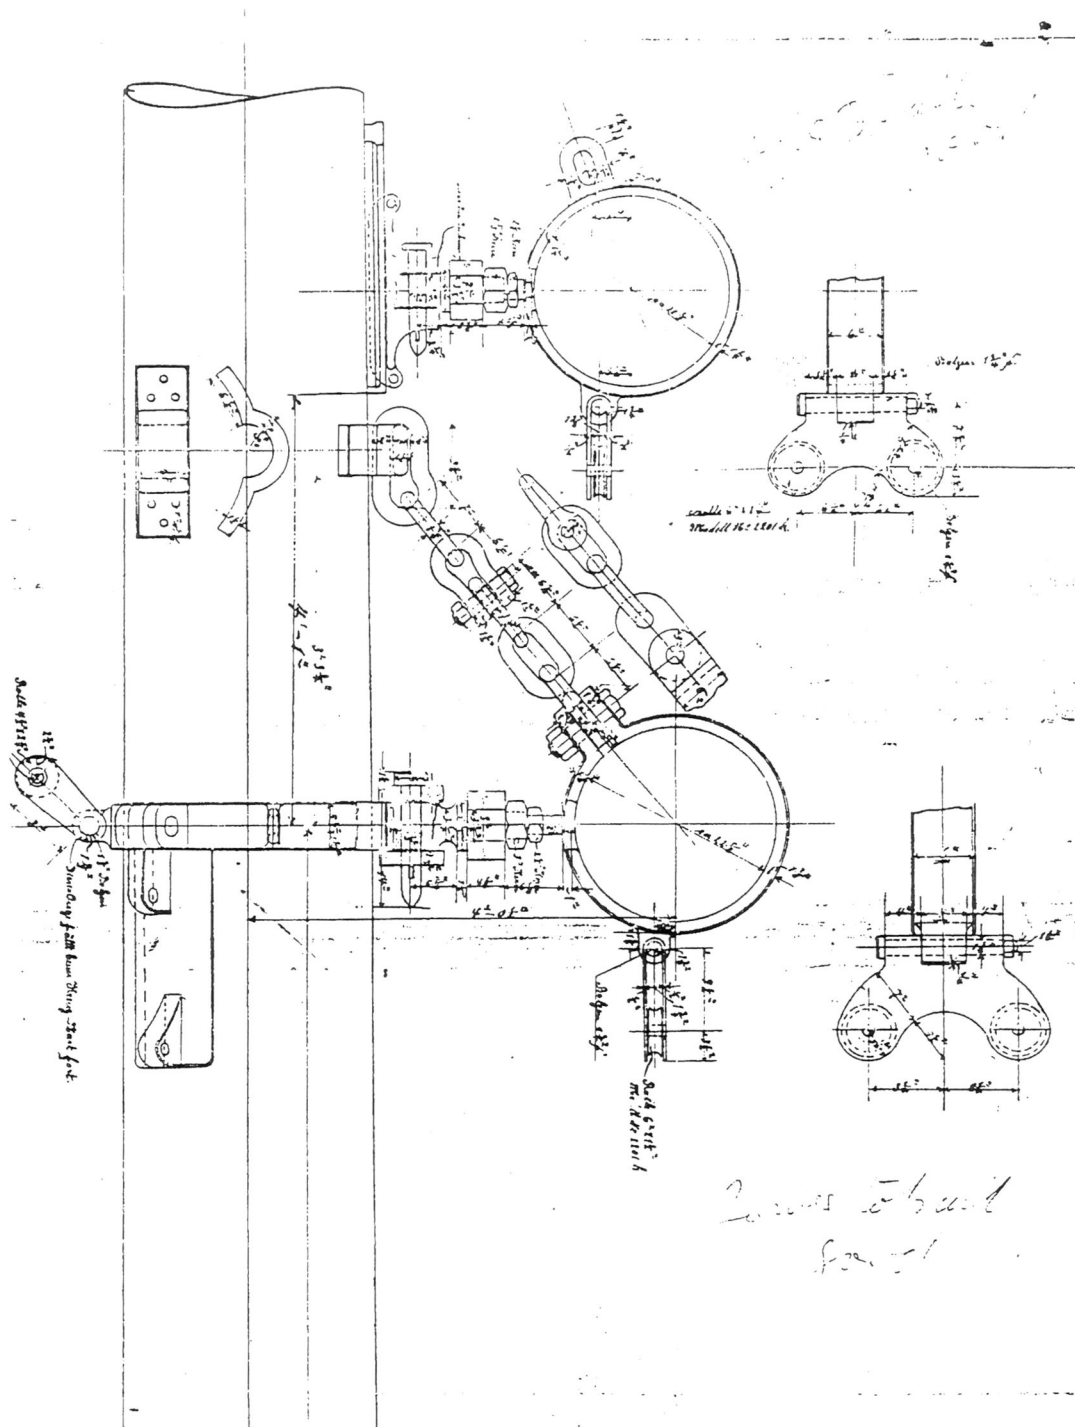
Cross-section of lower and upper topsail yards, with royal stay fitting and details of sheet blocks
